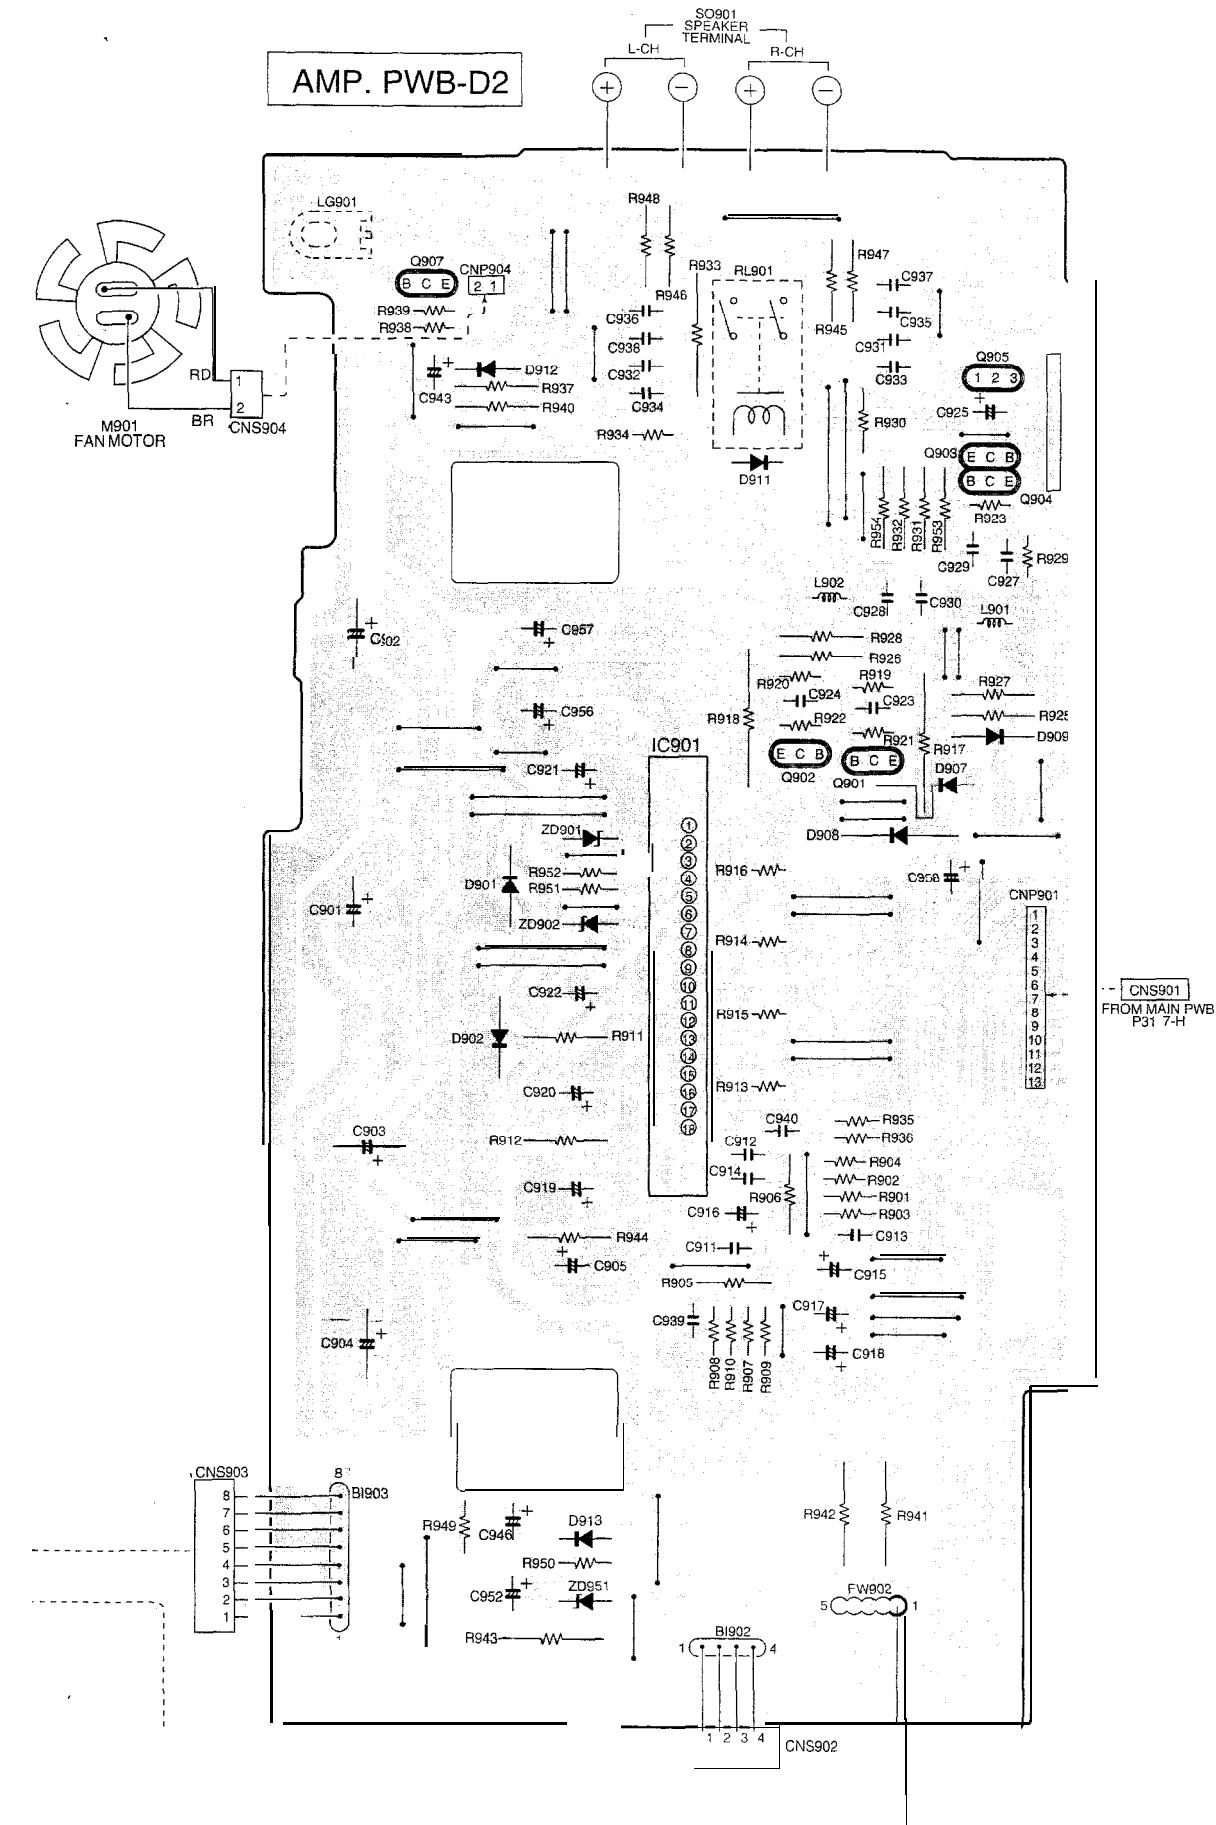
WIRING SIDE OF P.W.BOARD (7/9)
